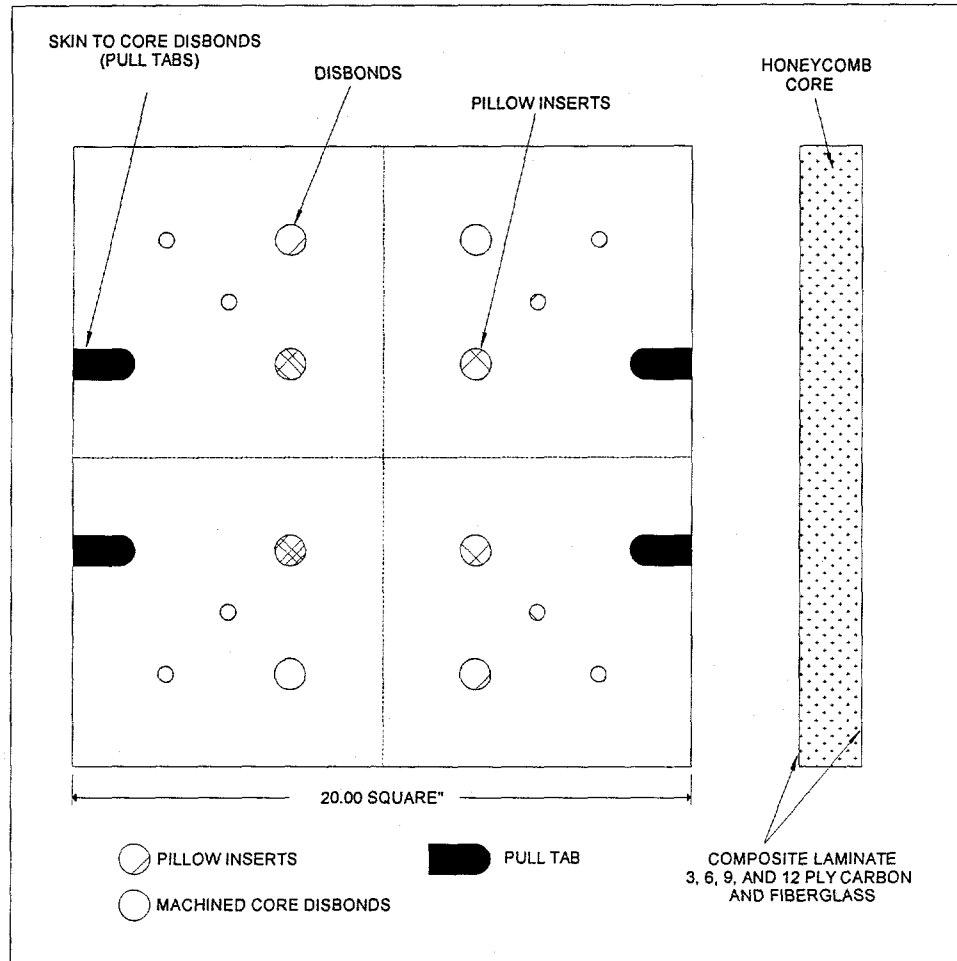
Design Drawing of Composite Honeycomb Panel Containing Four Different Construction Types and Engineered Flaws
